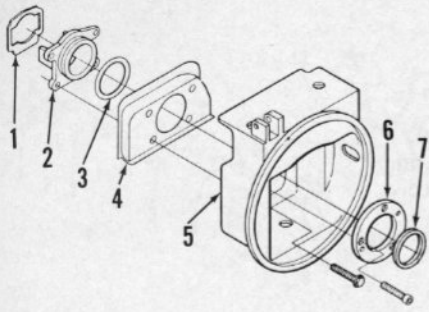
Exploded view of carburetor chamber assembly.
